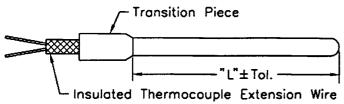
Sheathed Thermocouple Assembly with Transition Piece
